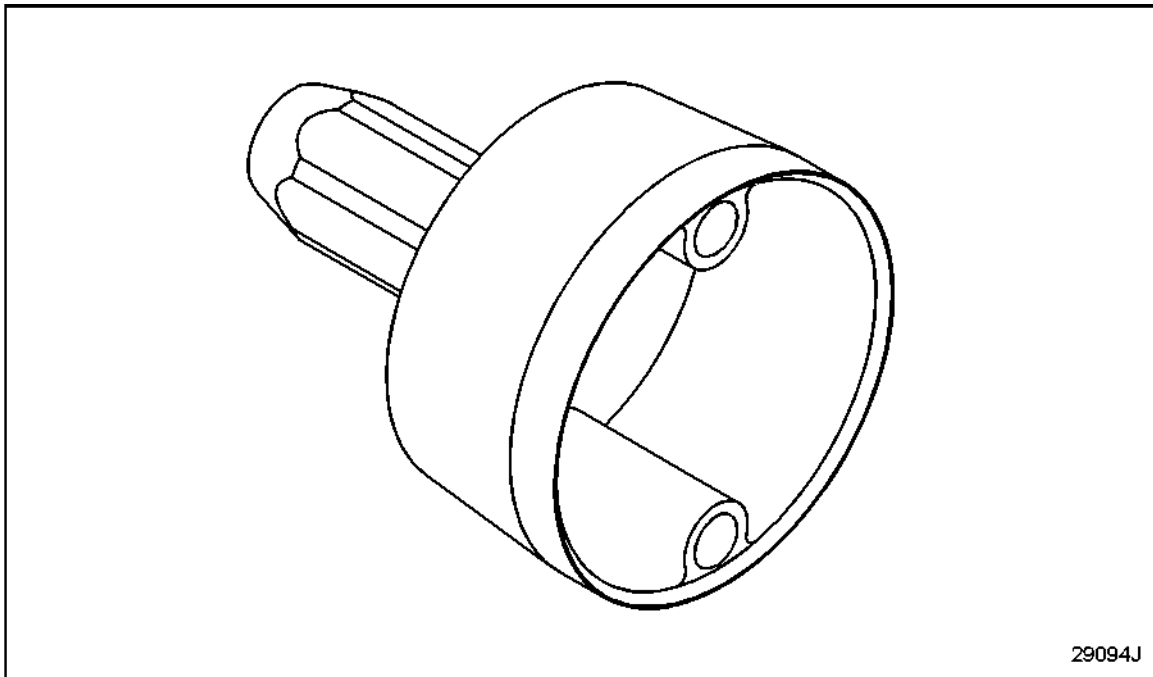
Front/Rear Seal Expander, J 22425-B
